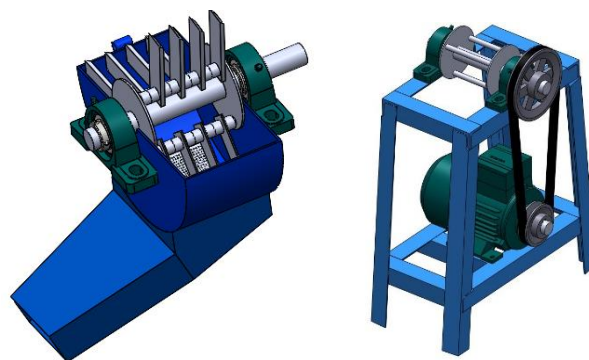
Milling assembly (left) and transmission assembly (right) of the mini-corn mill
